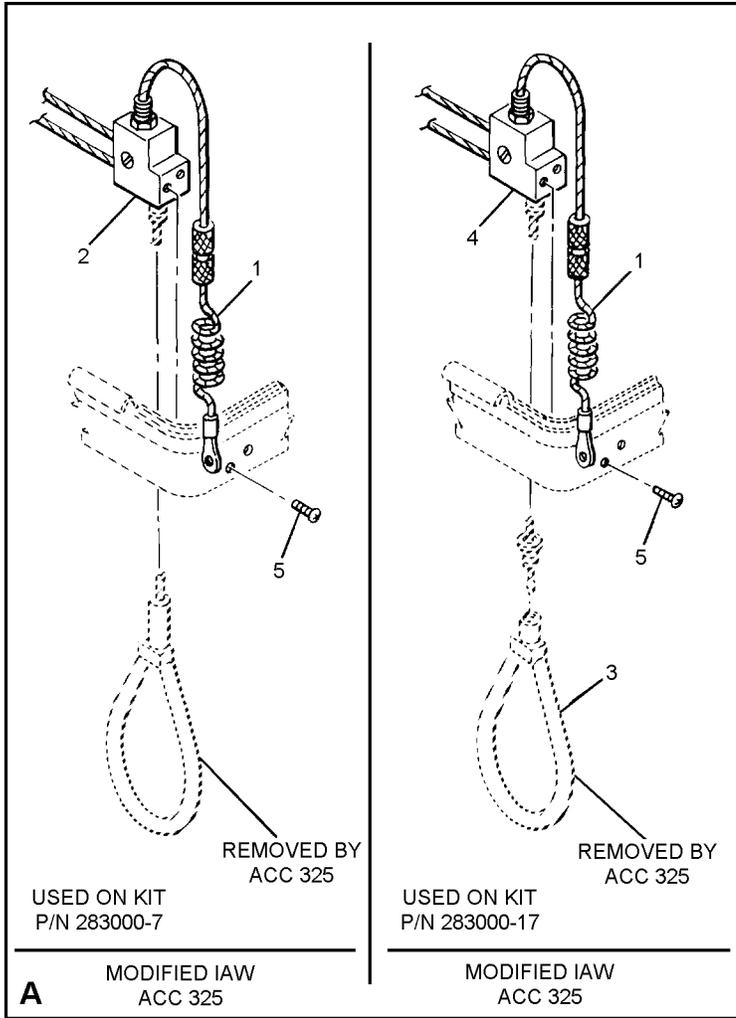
Upper Container Assembly (Rocket Jet P/N 283200-7 and 283200-17)
